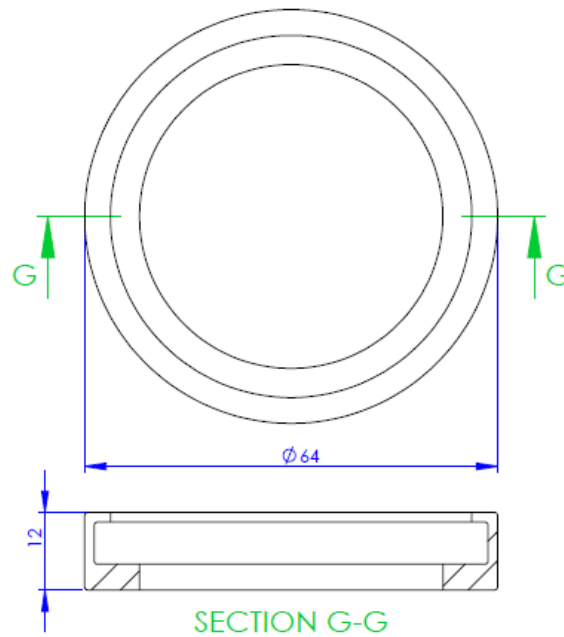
Diagram and dimensions of the SWITCH - Glass Attachment Silicone Seal. All dimensions are in mm.
